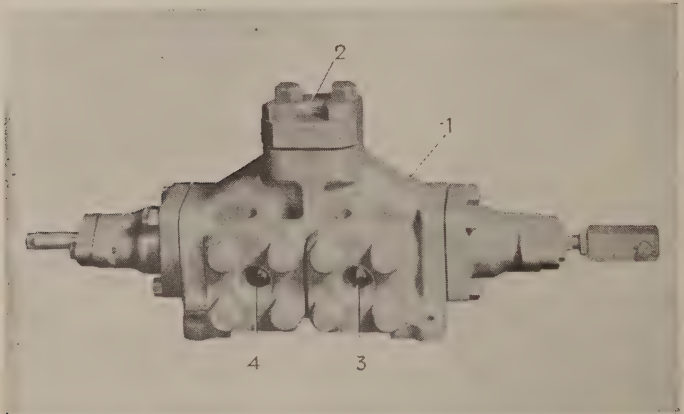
Control valve. (1) Intake port is on other side of valve; (2) pressure port; (3) and (4) cylinder ports. For sectional view see Fig. 323. (Courtesy of The Oilgear Company.)
